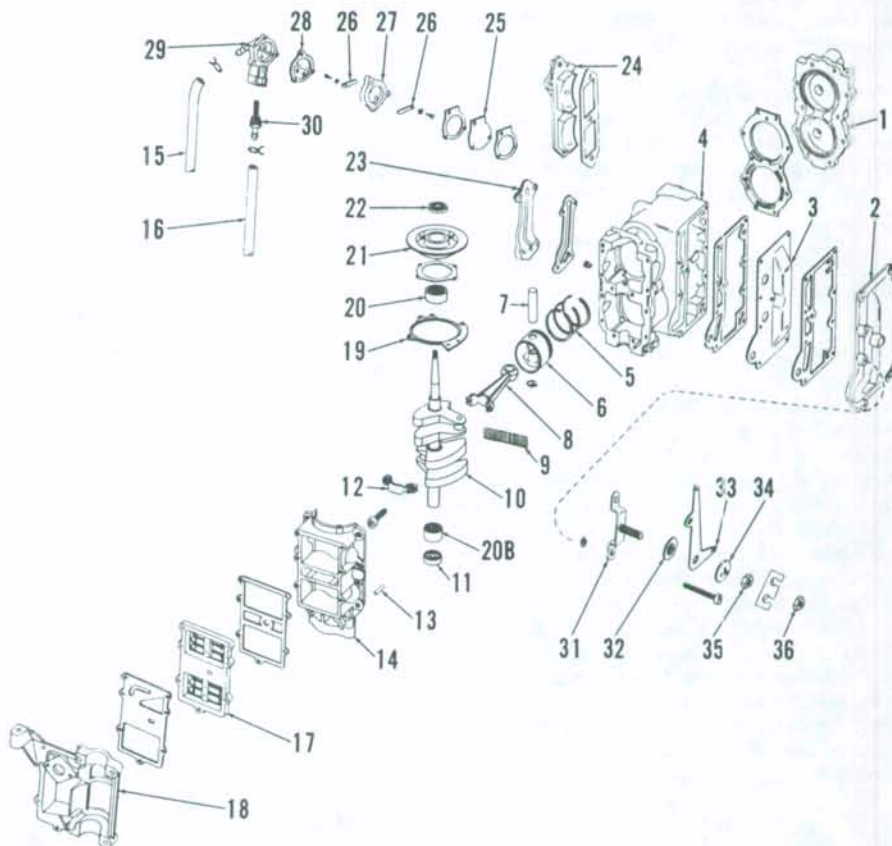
Exploded view of power head and associated parts. Bearing (20B) is used on 9.2 hp motors.
